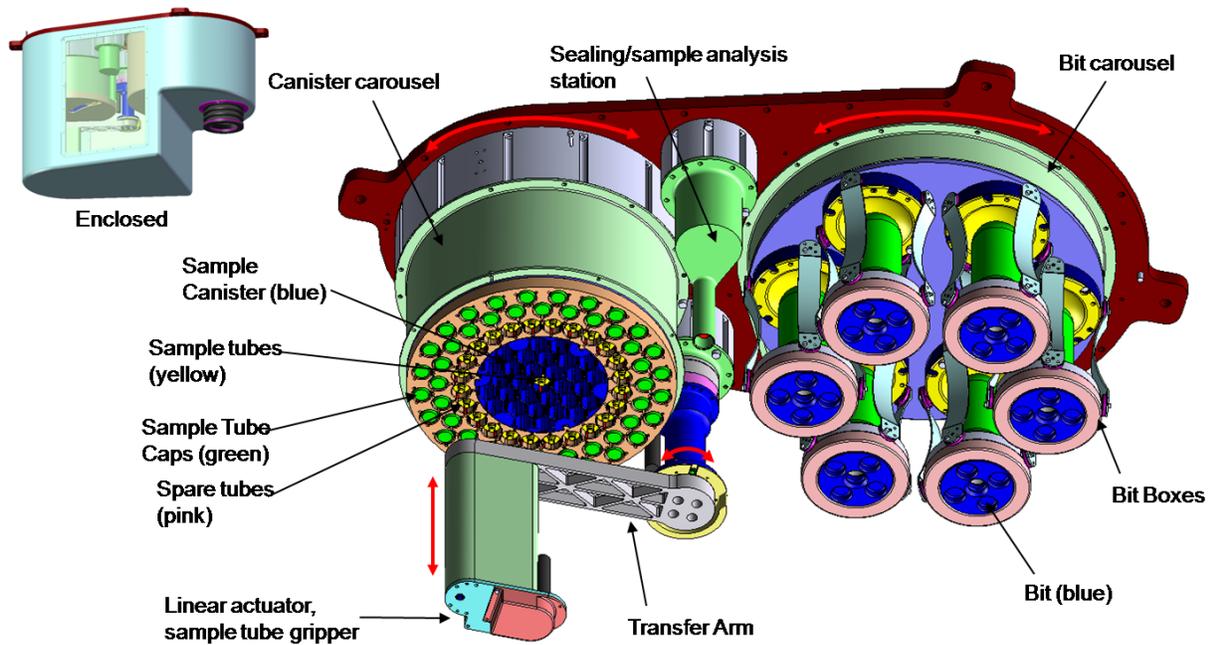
The Sample Handling Encapsulation and Containment (SHEC) system
